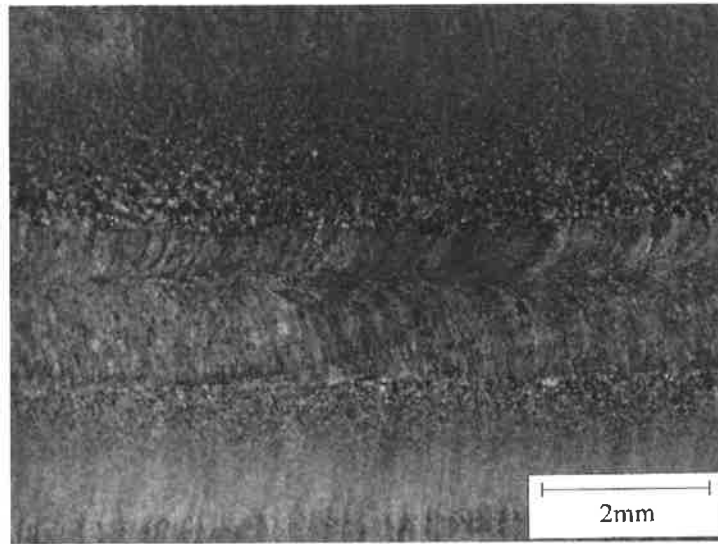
Longitudinal horizontal section of a weld made at 300mm/min and 128A (heat input equal to 0.64kJ/mm). No hollow bead formed in this weld.
